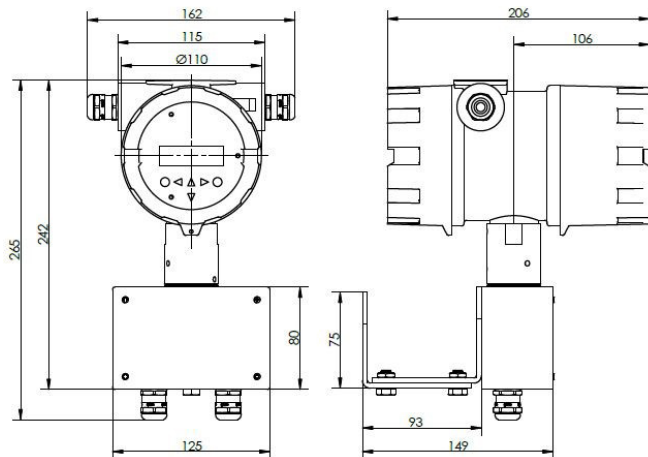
Dimensions measuring transducer mag-flux® M1 with mounting brackets
